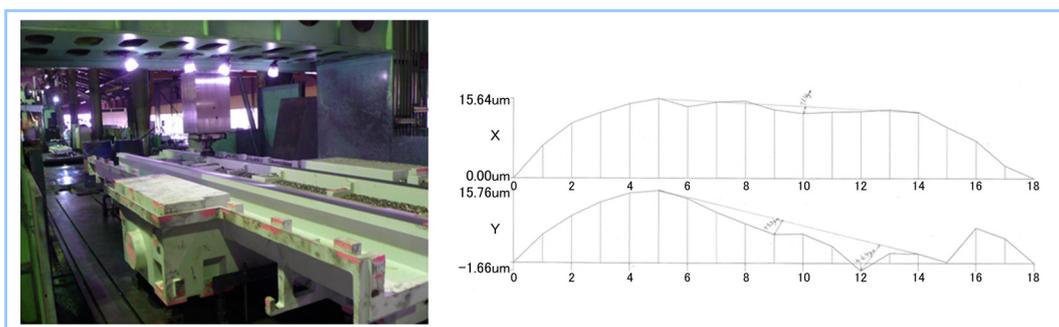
Accuracy adjustment of bed cutting machine and bed cutting
